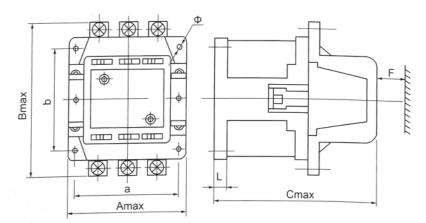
CJ20-10, 16, 25 shape and installation dimensions
